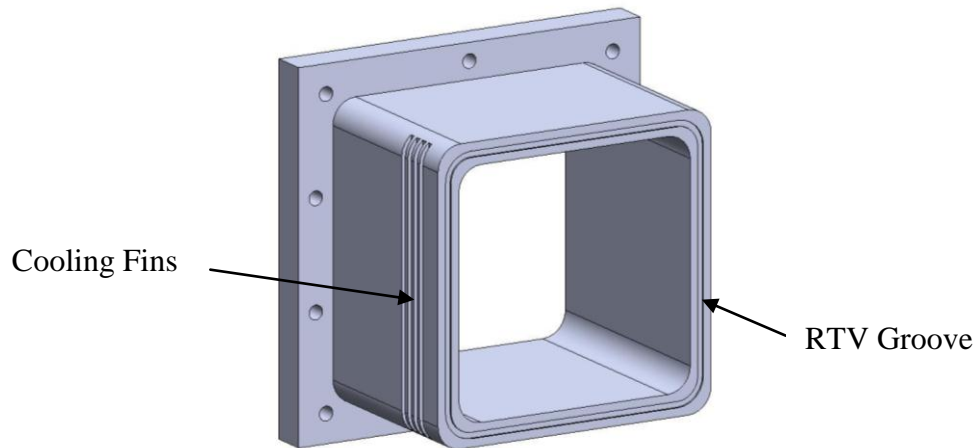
SCT Engine- Welded Insert View Showing Grooves
